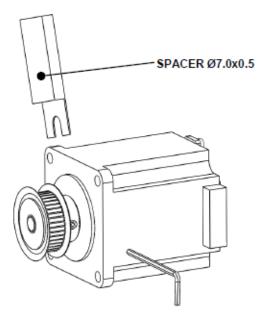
Locate the Pulley on the Reagent Pipettor X Drive
